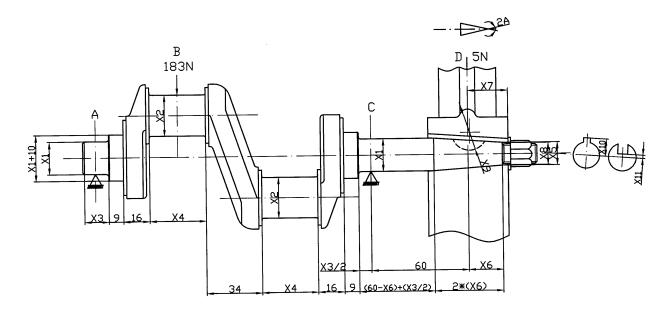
The crankshaft with its assembly components and design variables  $(x_i, i=1,2,..,11)$ .
